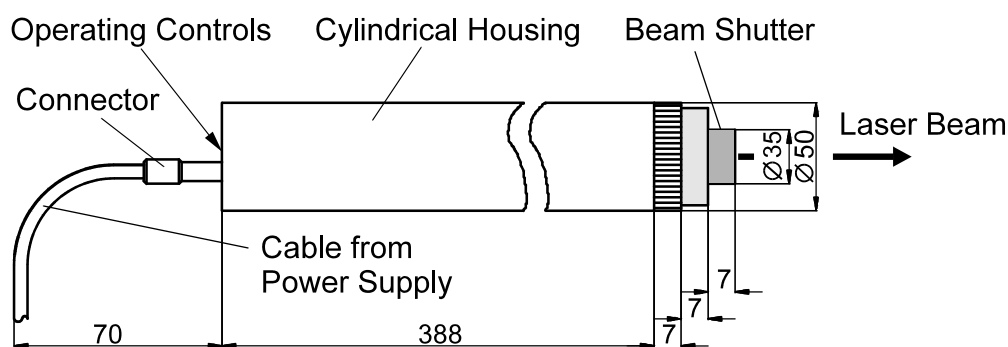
Dimensional drawing of a Model SL 02/1 / SL 02/2 laser head.
